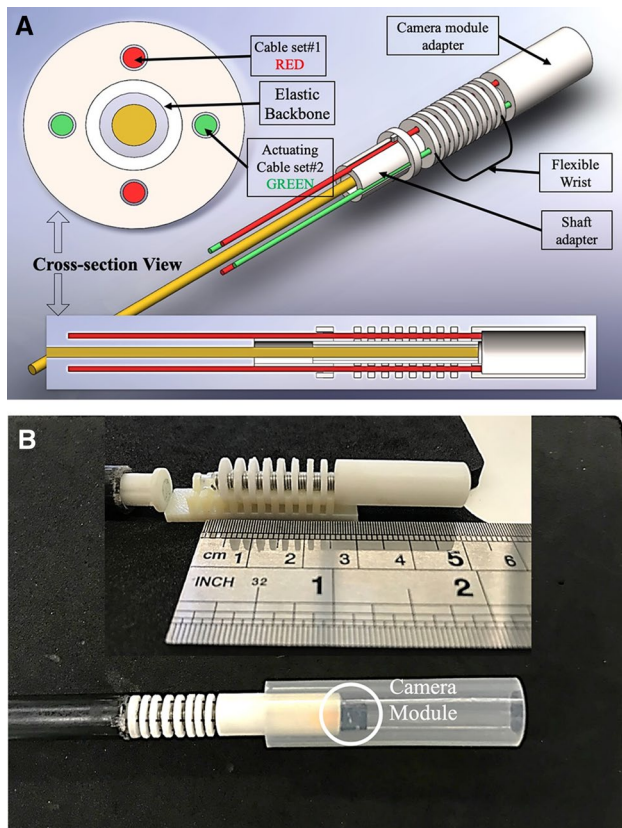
Design and the dimension of the flexible wrist. A The design of the flexible wrist is based on the continuum mechanism which is driven by four cables. The flexible wrist consists of eight disks. On each disk, there are four holes symmetrically distributed to pilot the cables. The flexible wrist can provide two orthogonal bending motions. B The prototype of the flexible wrist. The thickness of each disk is 1 mm. And the eight disks are equally spaced with a distance of 2 mm, which makes the total length of flexible wrist 26 mm. Vertebrae have an outer diameter of 7.5 mm, with 4 pilot holes that have a diameter of 1 mm. The camera module is installed at the end of the flexible wrist by a 25 mm long adapter
